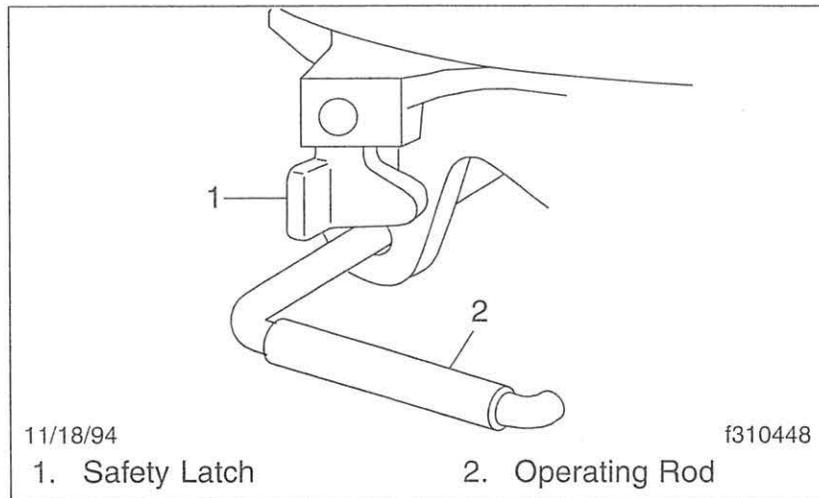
, Simplex Kingpin Locking Mechanism, Safety Latch (locked position)
